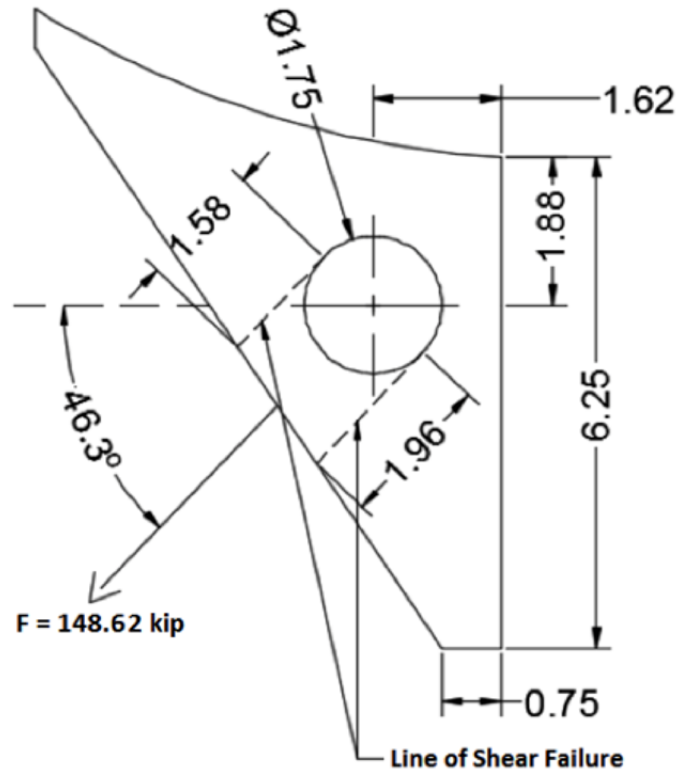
Tie-Down Rib Hole Loading
